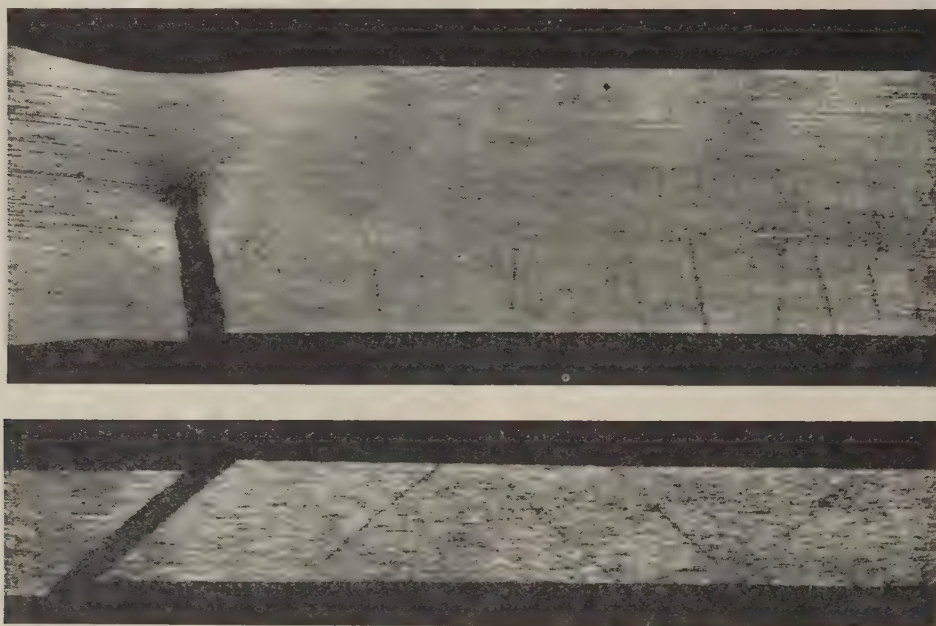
SIDE AND EDGE VIEWS OF TENSILE BAR, MACHINED FROM SECTION J2;  $\times 1\frac{1}{2}$
